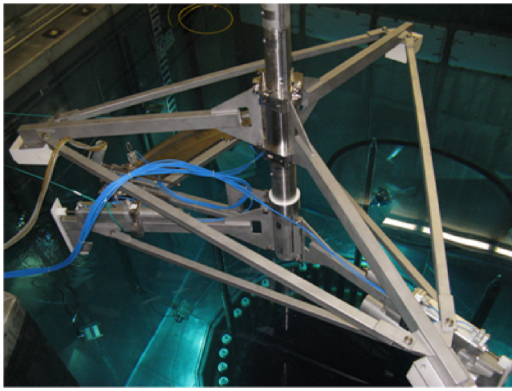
Carrier for the milling unit for removing scraping samples out of the RPV cladding.
